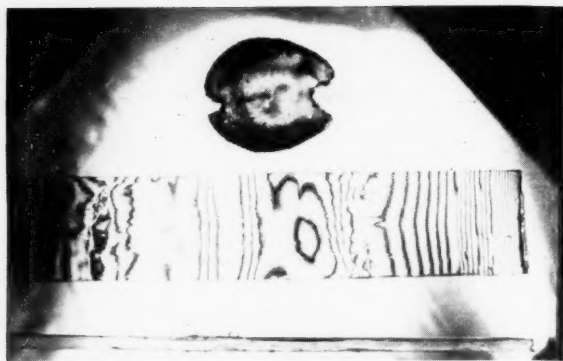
Top View (Center) and Edge Section View (Bottom) Showing Strains Produced by Pressing a Cylindrical Polystyrene Extrusion; Section through the Unmolded Portion of the Slab Is Also Shown (Top)
